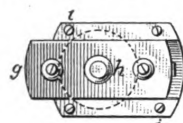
Front View of Chuck. Fig. 12.—Back View of Chuck.
